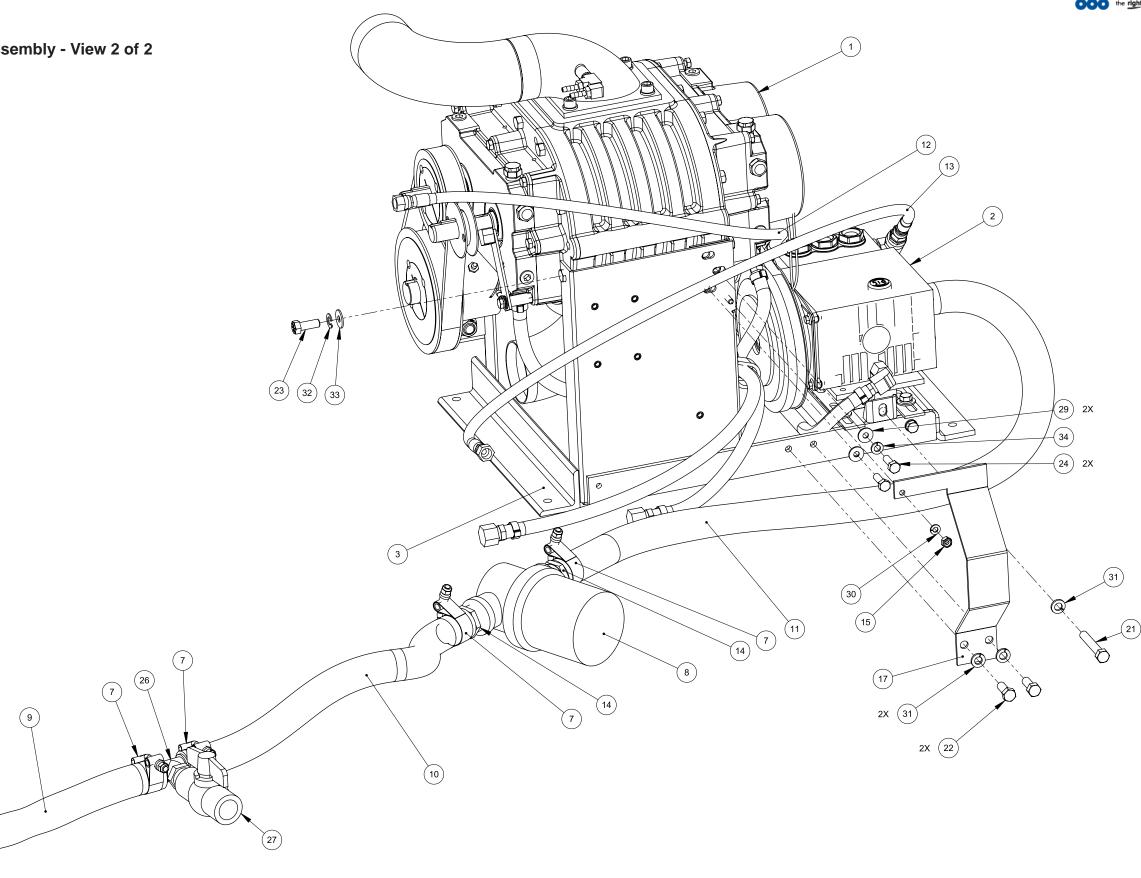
Power Pack Assembly - View 2 of 2 601-004-741 Rev. E
